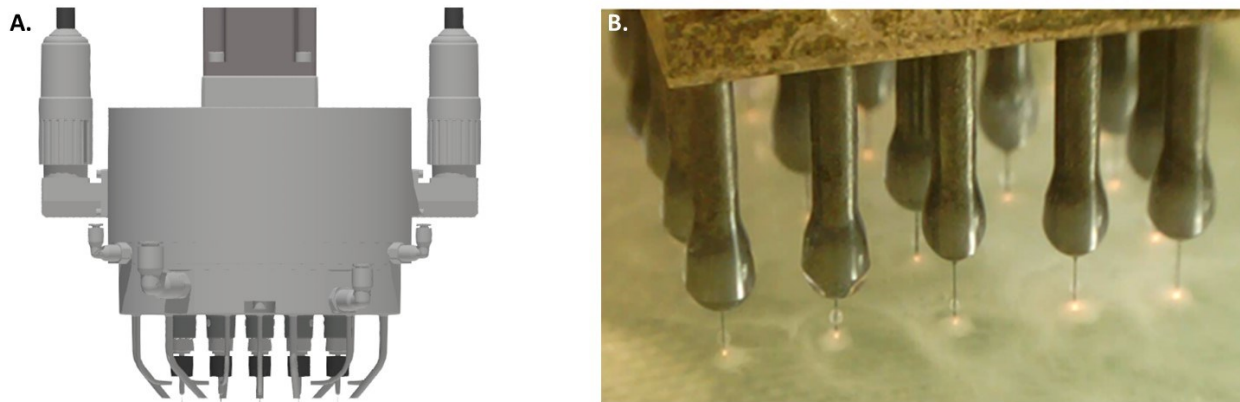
Schematics of the multi-tool machining head (25 tools) for parallel SACE machining, developed at Posalux SA [224]. A. 3D model of the developed multi-tool to be mounted on the machining head. B. SACE machining (here micro-hole drilling) using a prototype of the multi-tool machining head.
